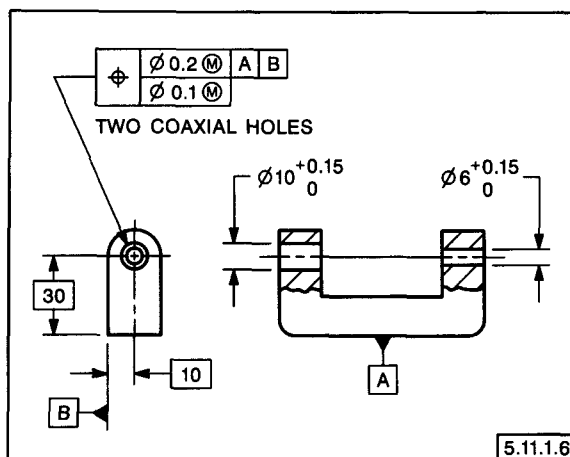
POSITIONAL TOLERANCING FOR COAXIAL HOLES OF DIFFERENT SIZE
